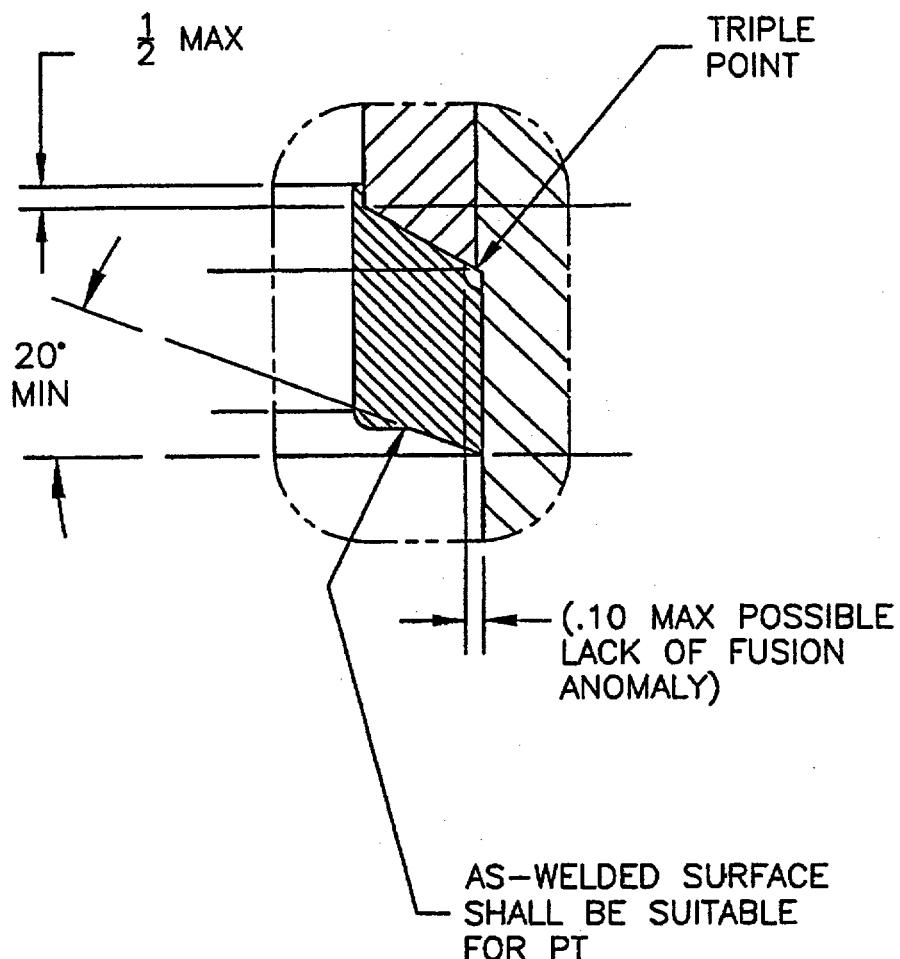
Weld Anomaly in Temper Bead Weld Repair
